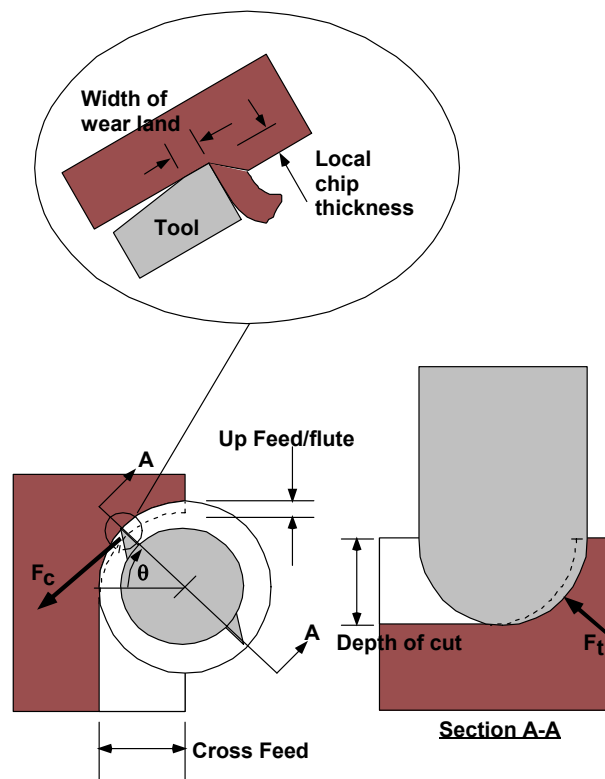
Chip Geometry and Tool Forces for Ball End Mills
